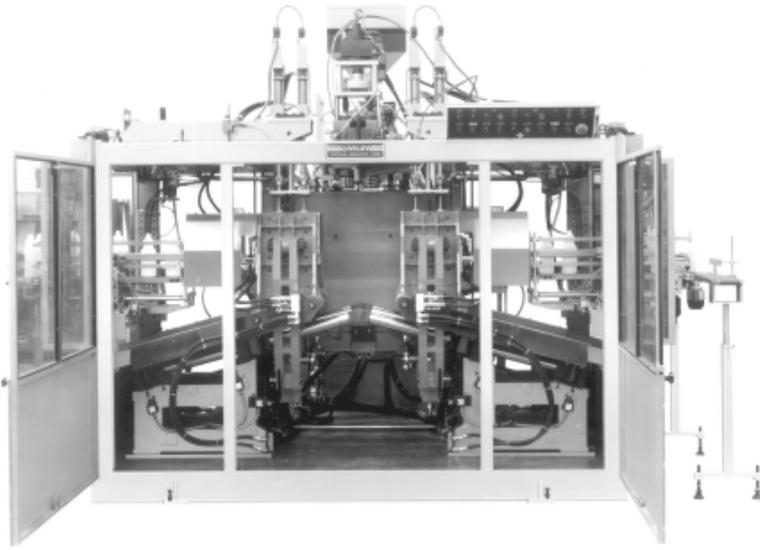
Continuous extrusion blow molding machine with a shuttle mold carrier.
